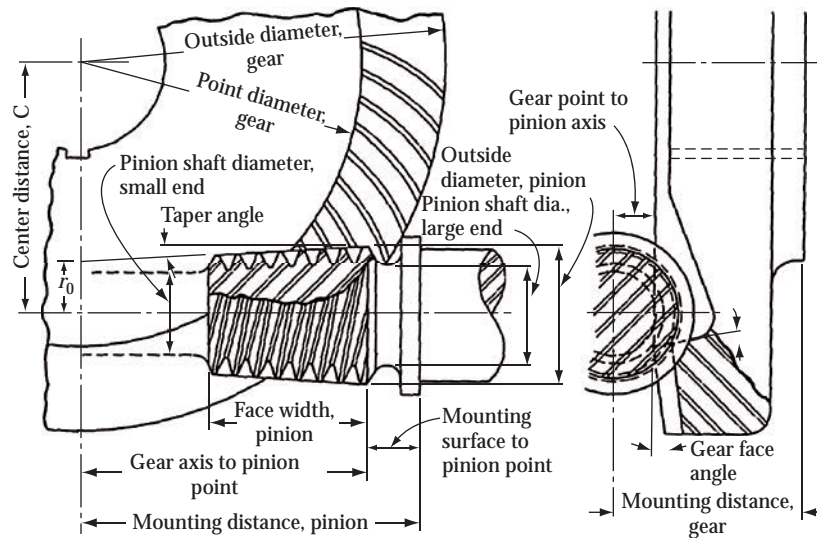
Spiroid gearset—mounting and gear blank nomenclature.
